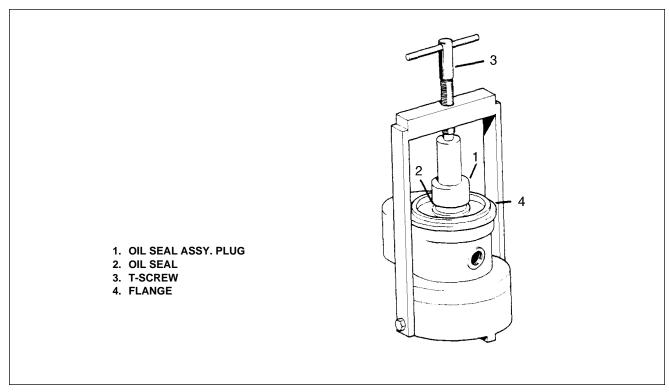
Position of Magneto on T-100 and Oil Seal Installation
